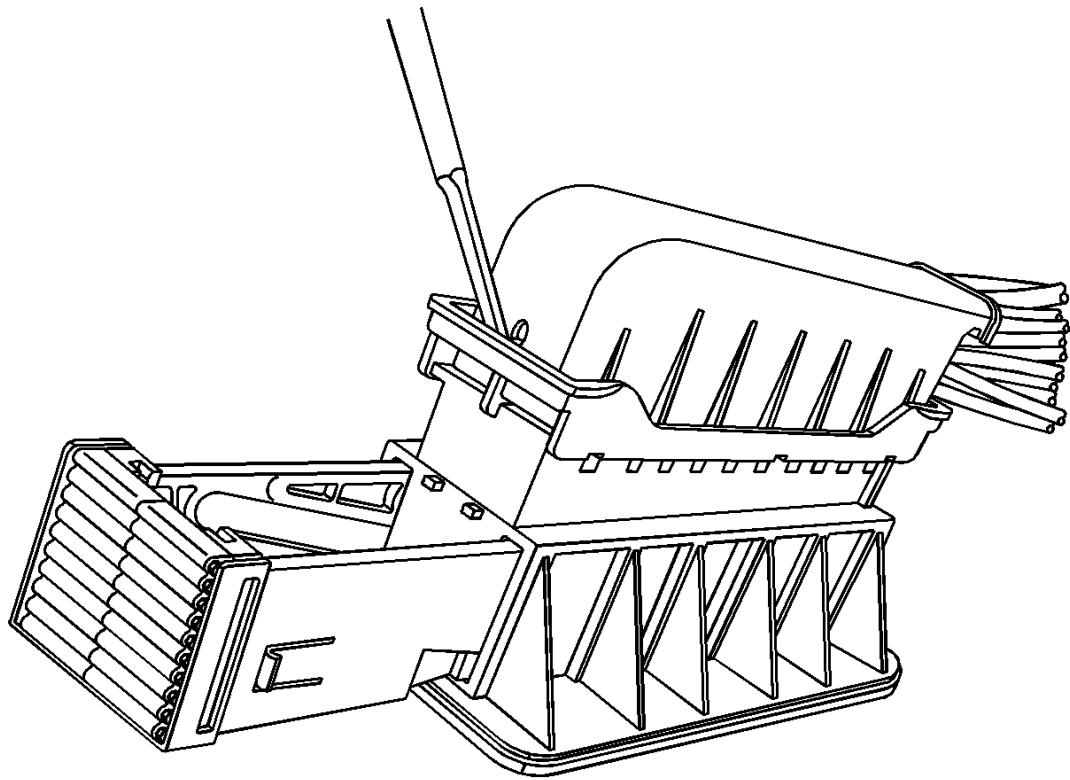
Releasing Connector Wire Dress Cover Locking Tab
